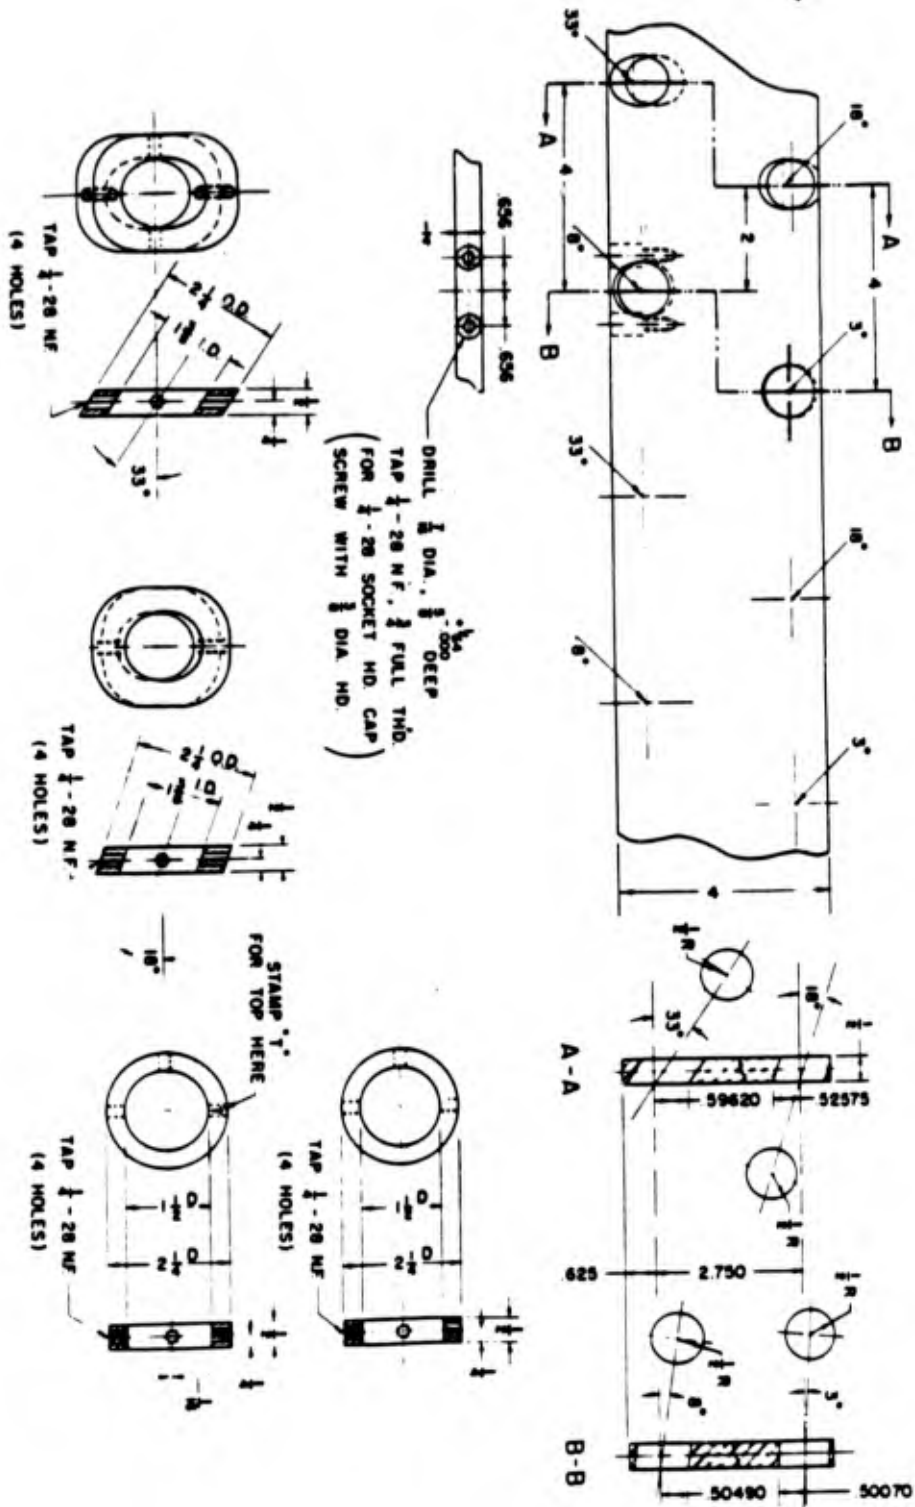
Design Details for a Collimator for Type C Gamma Buildings
